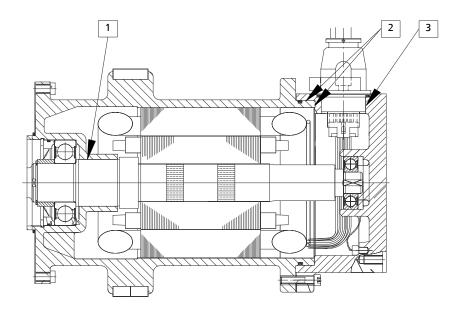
Flamepaths on explosion-proof motors – motor types DKM90 / 112 and MA09 / 11 $\,$
